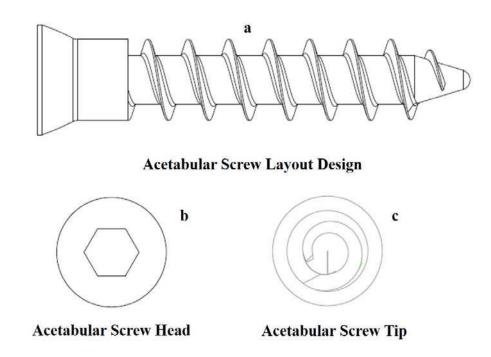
Draft view of screw (a) Standard acetabular screw layout design (b) Hexagonal head of screw to anchor with acetabular cup (b) Blunt tip of acetabular tip to prevent vascular injury
